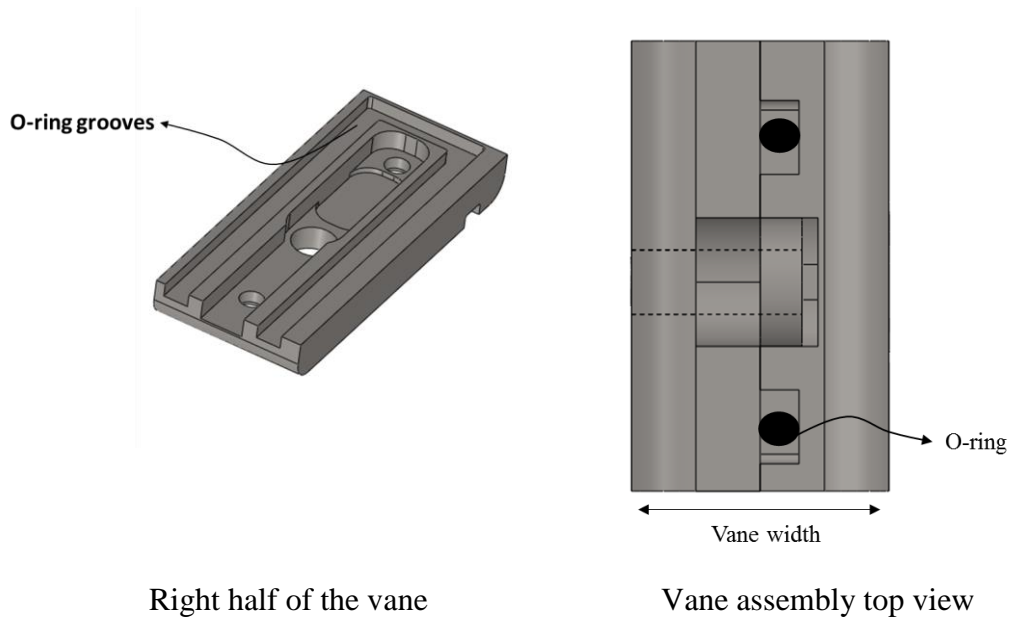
The vane mating surfaces has been grooved to accommodate an O-ring
